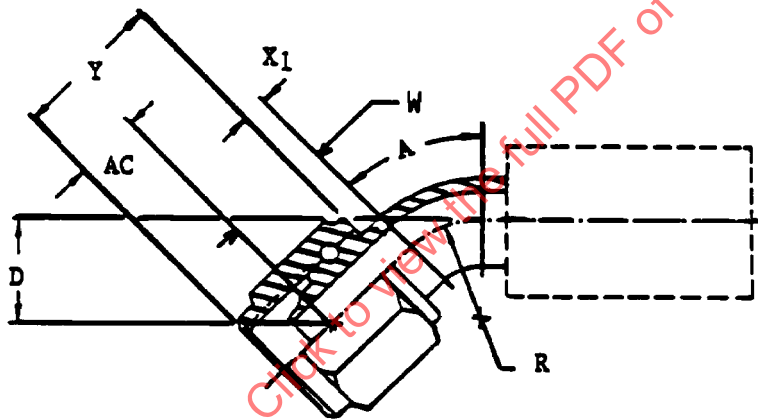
TYPICAL BENT TUBE ELBOW FITTING
